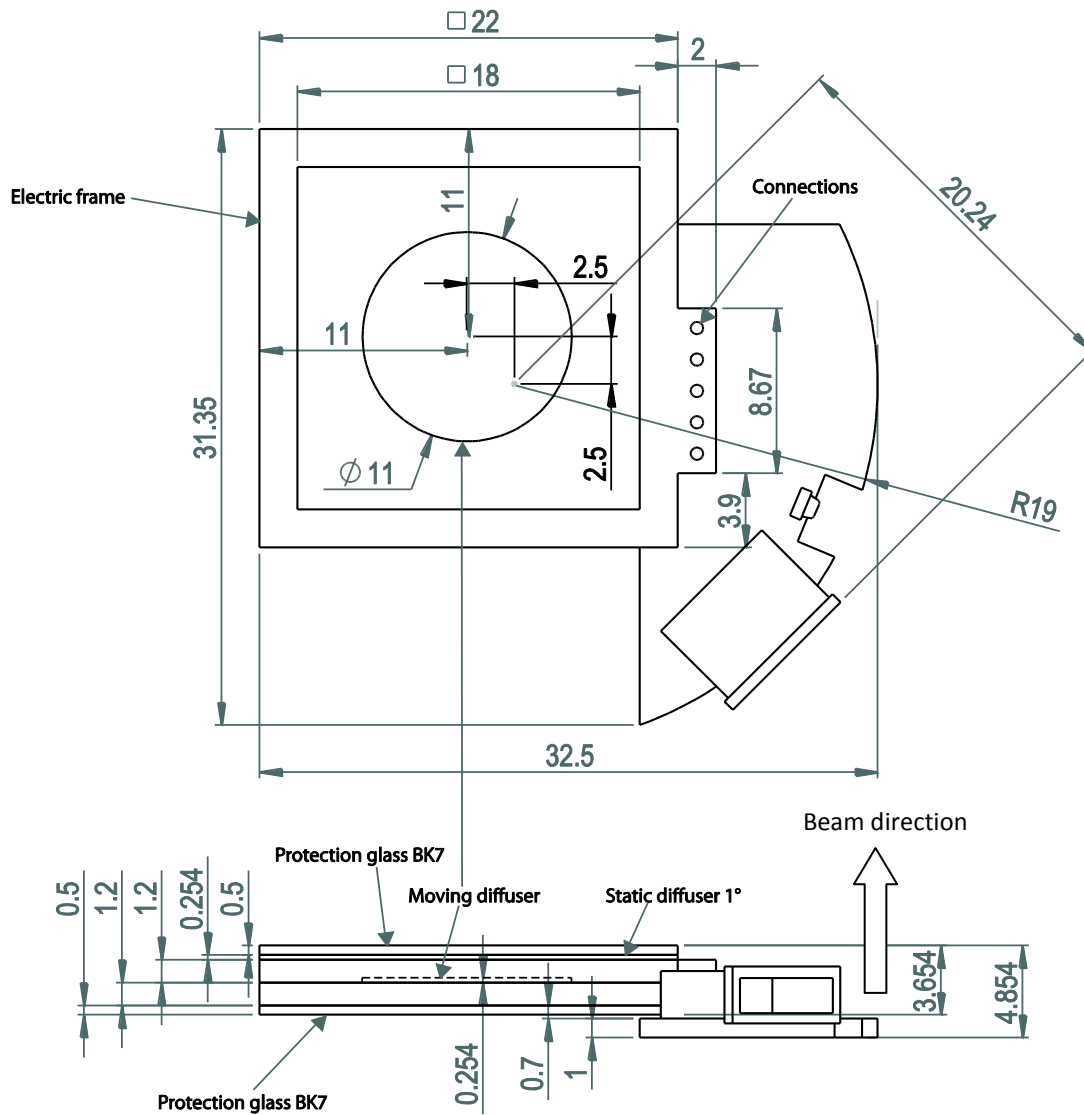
Mechanical drawing of the LSR-10-22-0-E (unit: mm)
